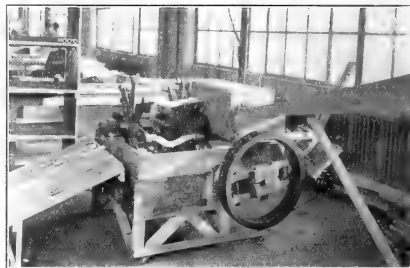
PRESSURE LEAKAGE TESTING MACHINE FOR FLEXIBLE HOSE.
